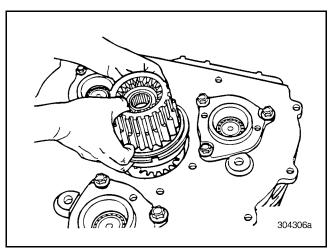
Removing Main Drive Gear from Front Mainshaft
